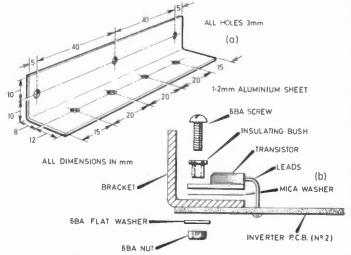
Mounting bracket for inverter p.c.b. (a) constructional details (b) cross section showing method of mounting the Darlington transistors which also provides the means for securing bracket to board.
